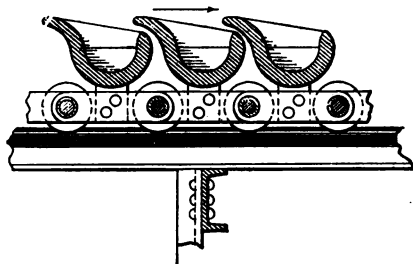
Section through the Moulds of the Uehling Pig Iron Casting Machine.
